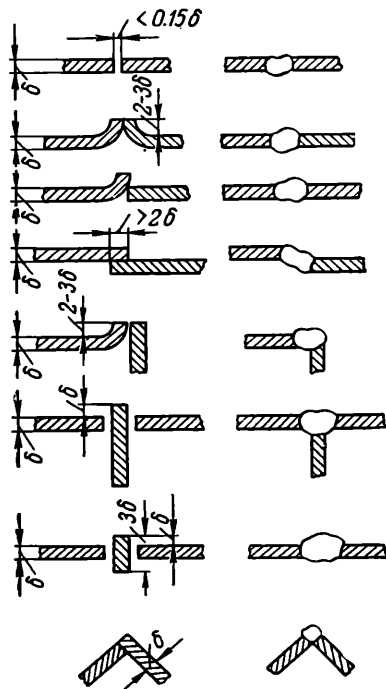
Edge preparation and joint designs for light-gauge aluminium alloys without filler metal
